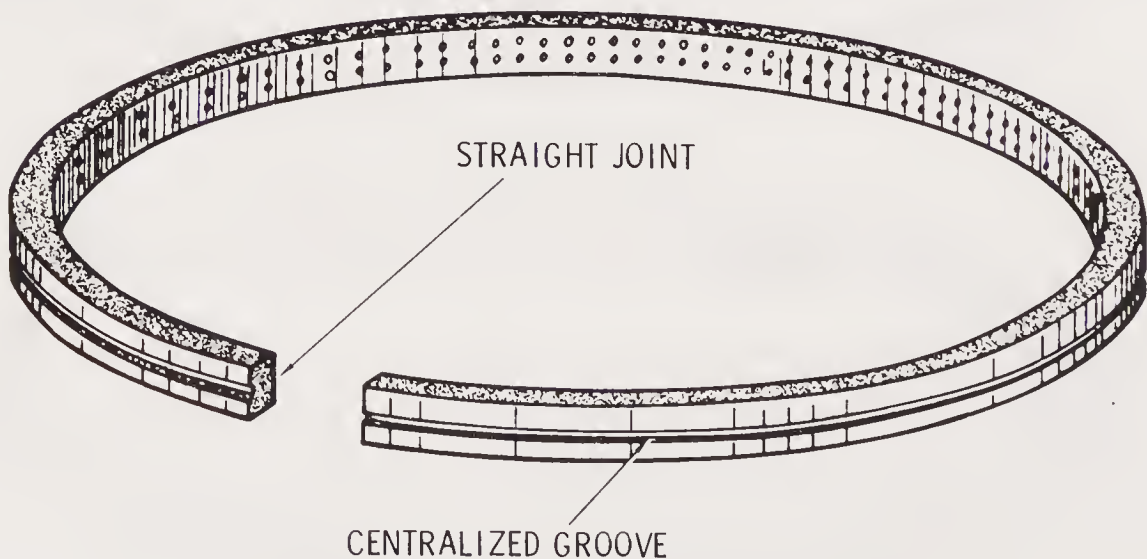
Centralized-grooved compression ring, sometimes called the oil seal compression ring.
